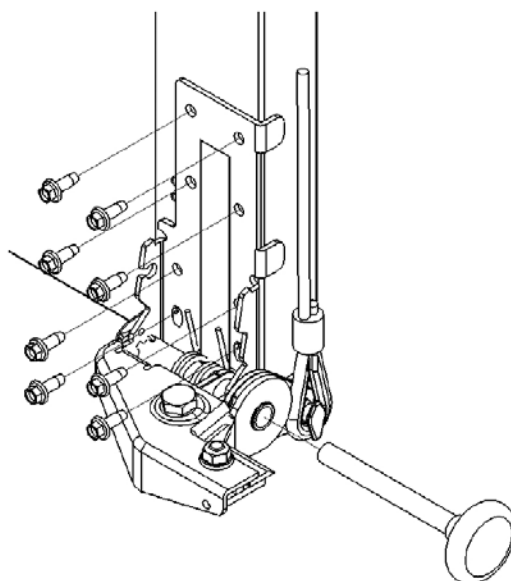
PARACHUTE SUPPORT ASSEMBLY
